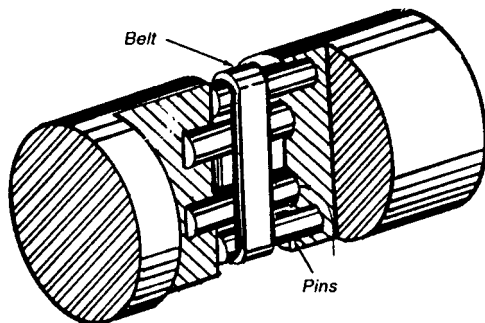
A flexible belt wrapped around four pins transmits only the lightest loads. The outer pins are smaller than the inner pins to ensure contact.
